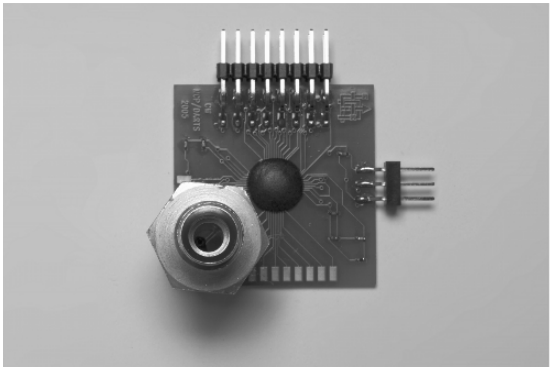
Test PCB with pressure sensor, connector and GSIC (covered with globtop coating).
